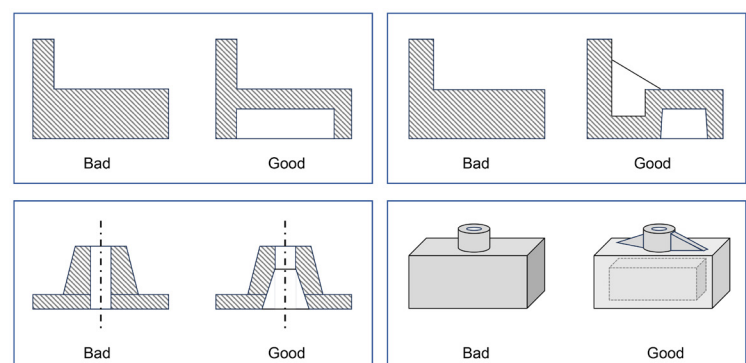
Suggestions for the design of the die casting parts with uniform wall thickness
